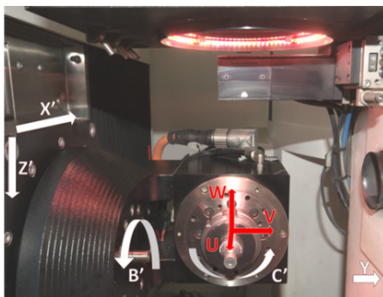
The Laser Line machine tool. The arrows represent schematically the 5 mechanical axes (white) and 3 optical axes (red)
